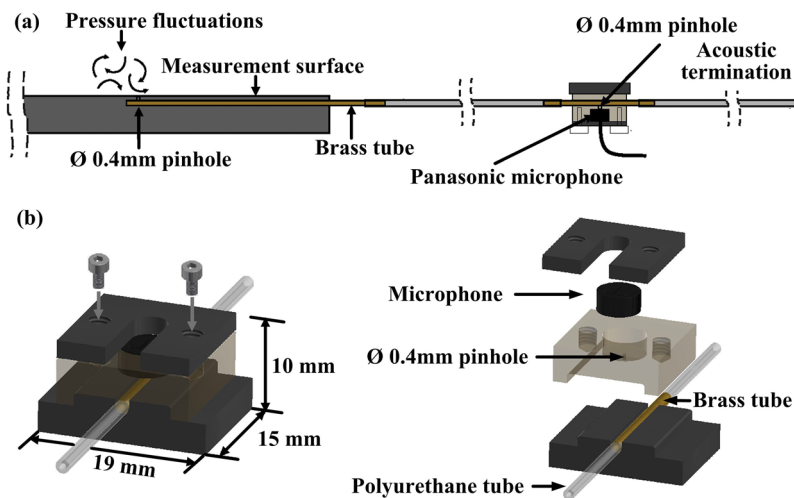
Schematic of the remote-sensing probe configuration for the (a) full view of the airfoil and (b) assembly view and exploded view of the remote-sensing probe.
